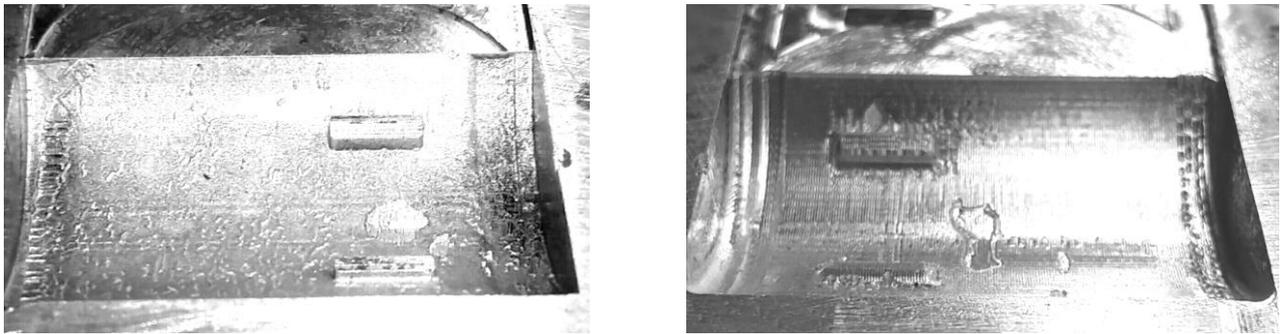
(a) Electrical Discharge Machining North Wall Cavity; (b) Micro Profile Milling South Wall cavity;
